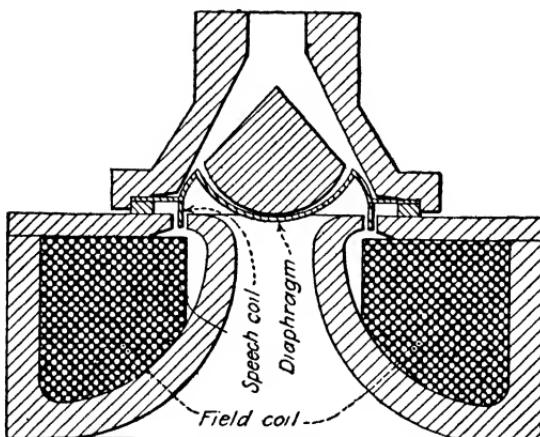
Drawing showing sectional view of Western Electric 555W receiver.
